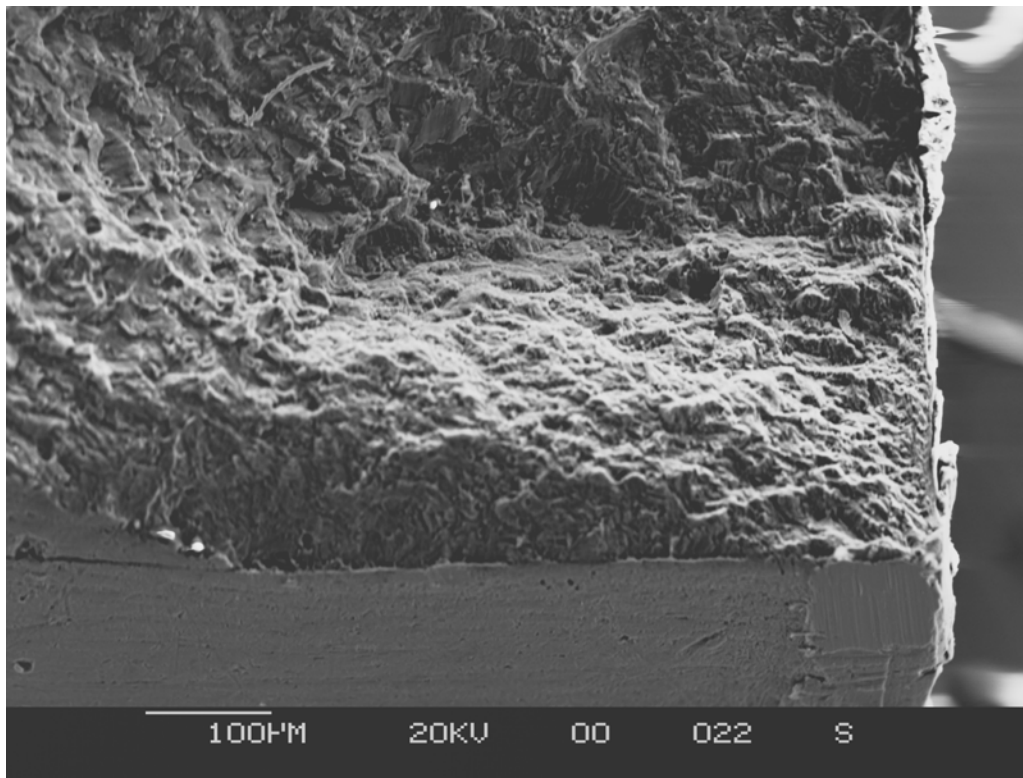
Fatigue Crack on Fracture Surface of Specimen 5635.
